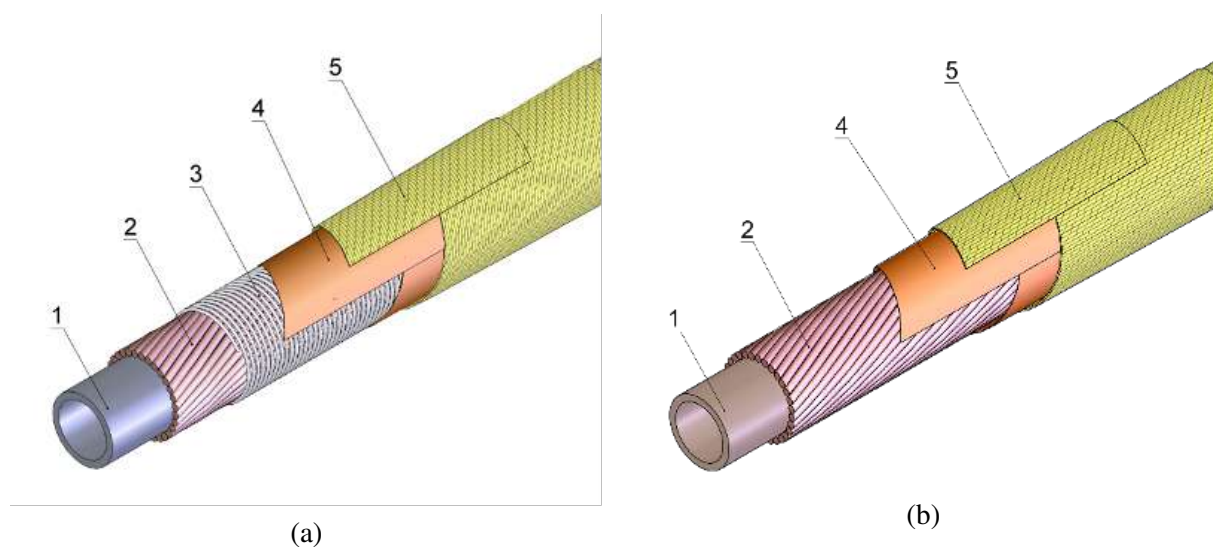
(a) Hollow SC cable of the Nuclotron and (b) the SPD solenoid: 1 – a tube with a channel for cooling; 2 – SC wire; 3 – fixing wire; 4 – polyimide tape; 5 – glass fiber tape impregnated with epoxy compound for hot hardening.
